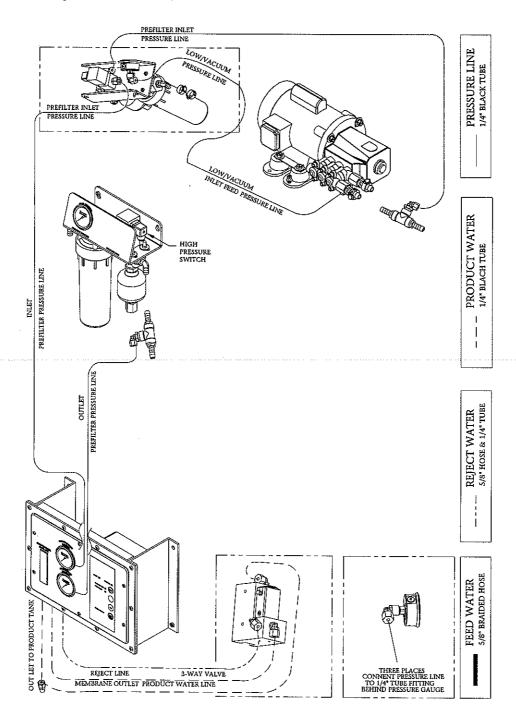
Illustration of the 1/4" black tube connections to sub-assemblies on a Modular System.
